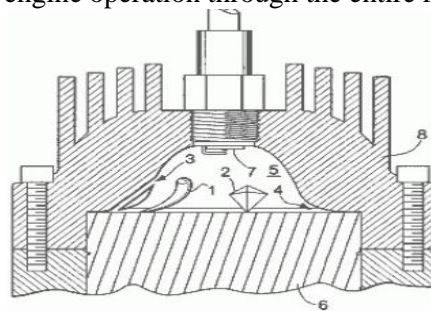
Sectional view of Cylinder head with grooves, channels and passages
